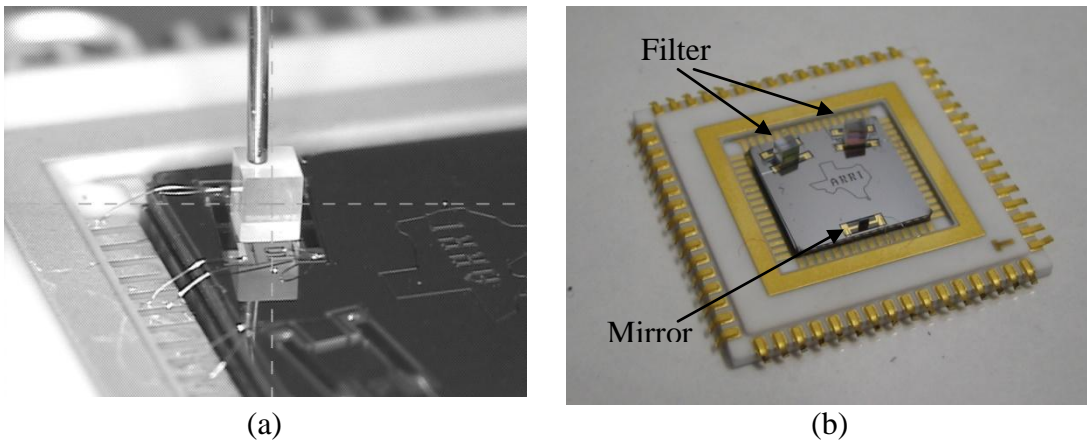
(a) A photo of inserting the filter into a socket with a vacuum gripper.
